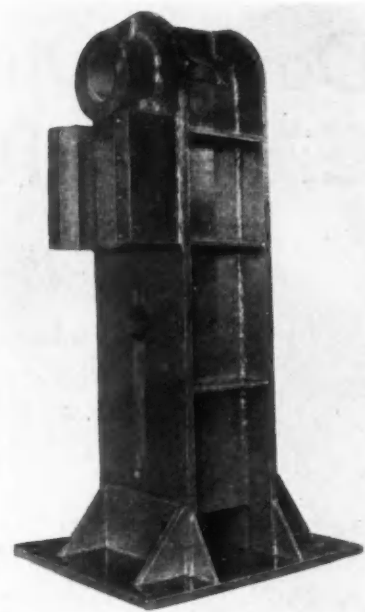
200-ton knuckle joint press in solid frame construction to minimize right to left dimensions
